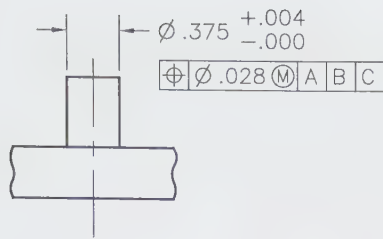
The MMC modifier, when used on the position tolerance for a hole, can significantly increase the allowable tolerance on the produced holes.
